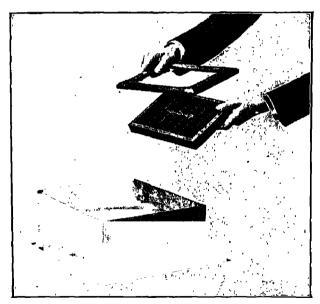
Method of making Small Sheets on IHAND Mould.
